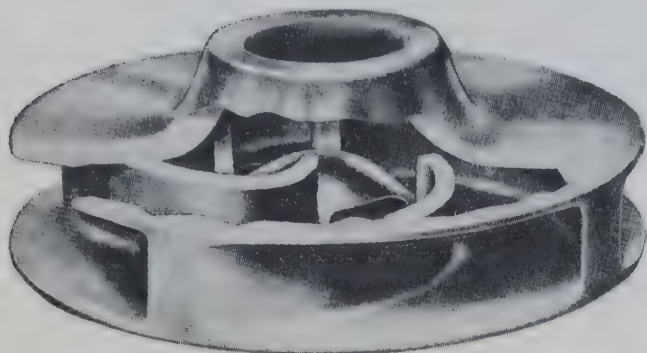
Cutaway view of high-head close-clearance impeller for service with corrosive liquids or suspensions containing small particles. (Nagle Pumps.)
